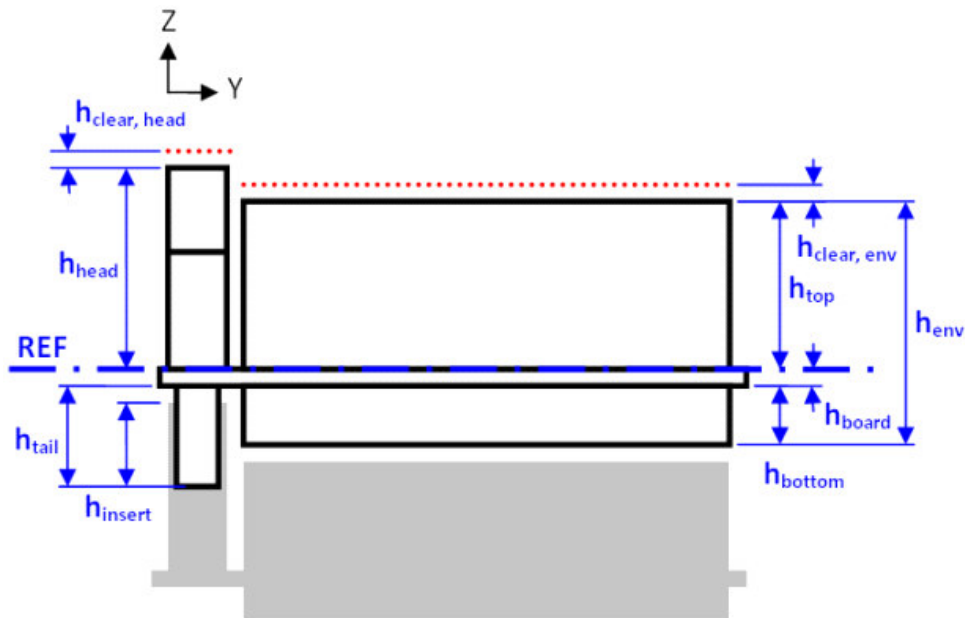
SAMTEC Connector Mechanical Interface Drawing
